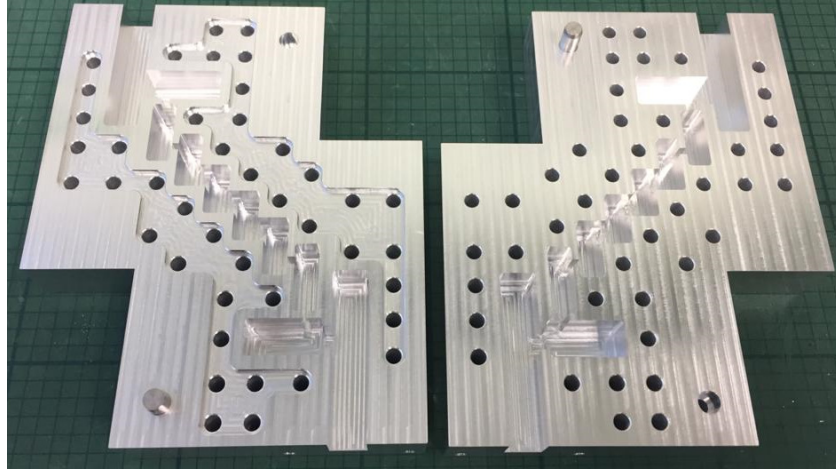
Manufactured prototype in aluminum of the E-plane folded hybrid staircase filter with manifold connections (Folded 5), without silver plating.
